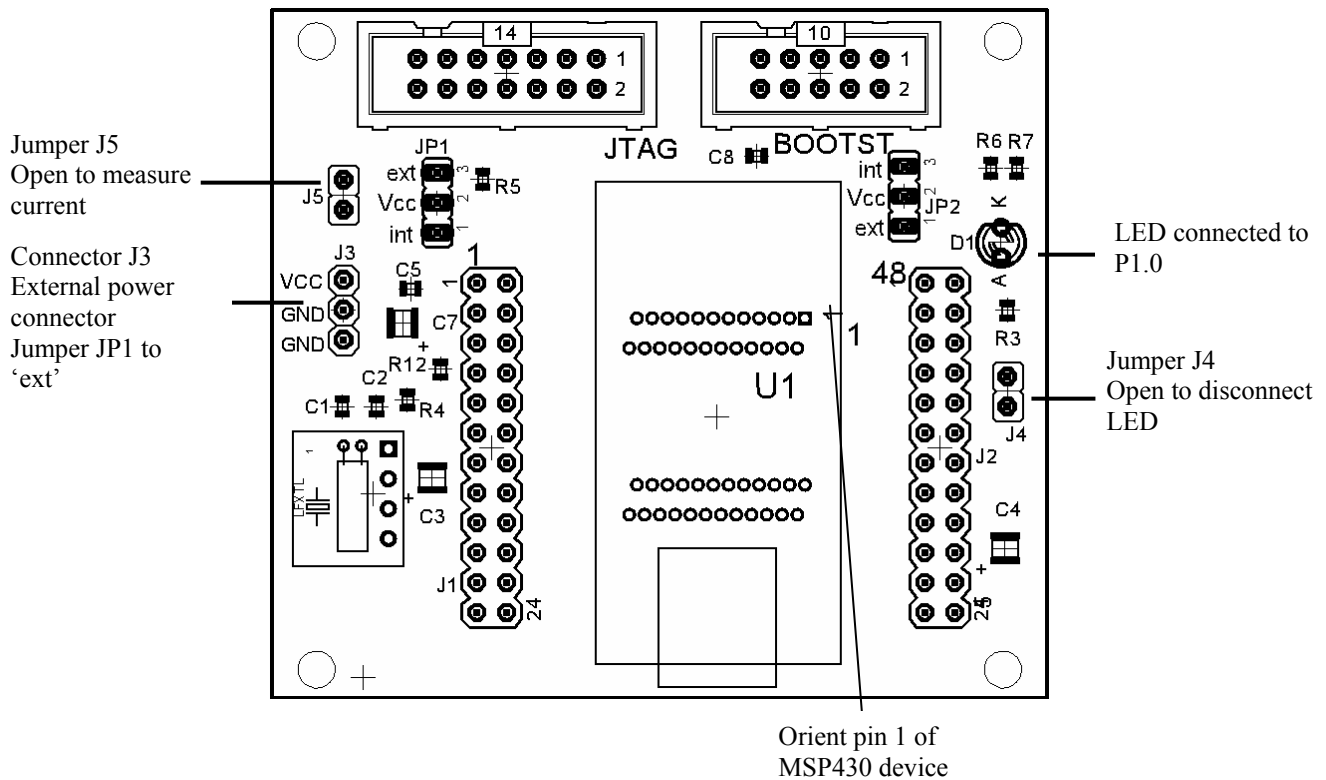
MSP-TS430DL48 Target Socket module, PCB
